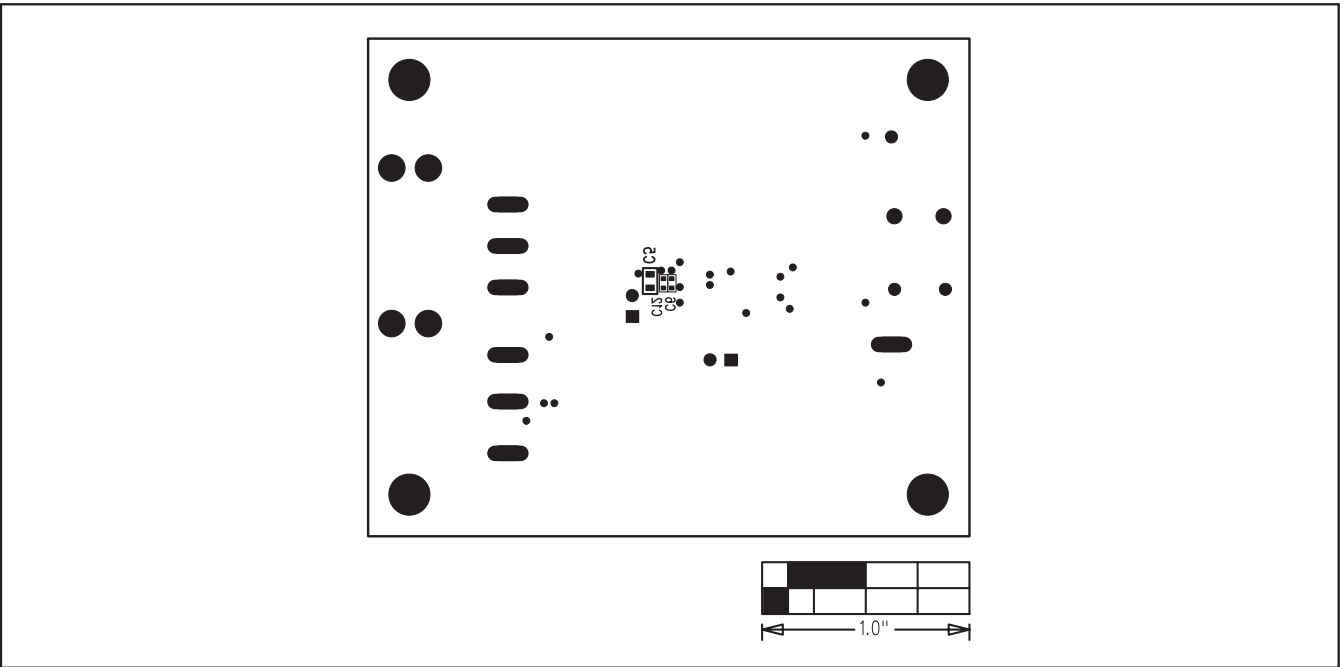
MAX13331 EV Kit Component Placement Guide—Solder Side
